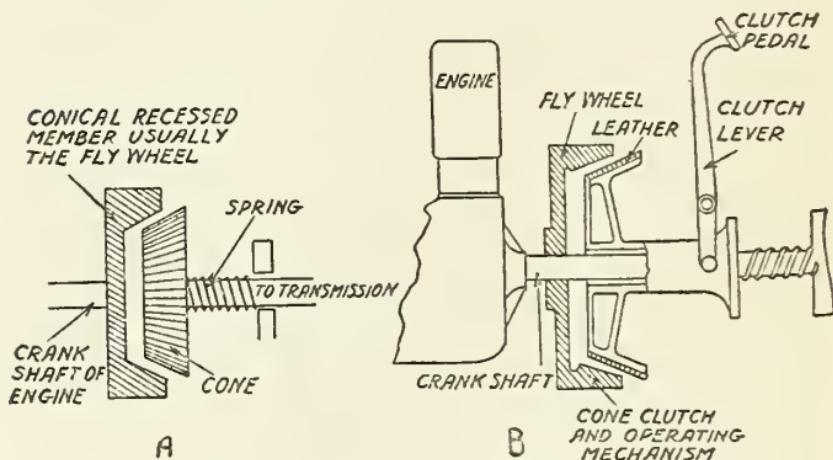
A. How a cone clutch works. B. Cone clutch and operating gear of an ordinary car.
